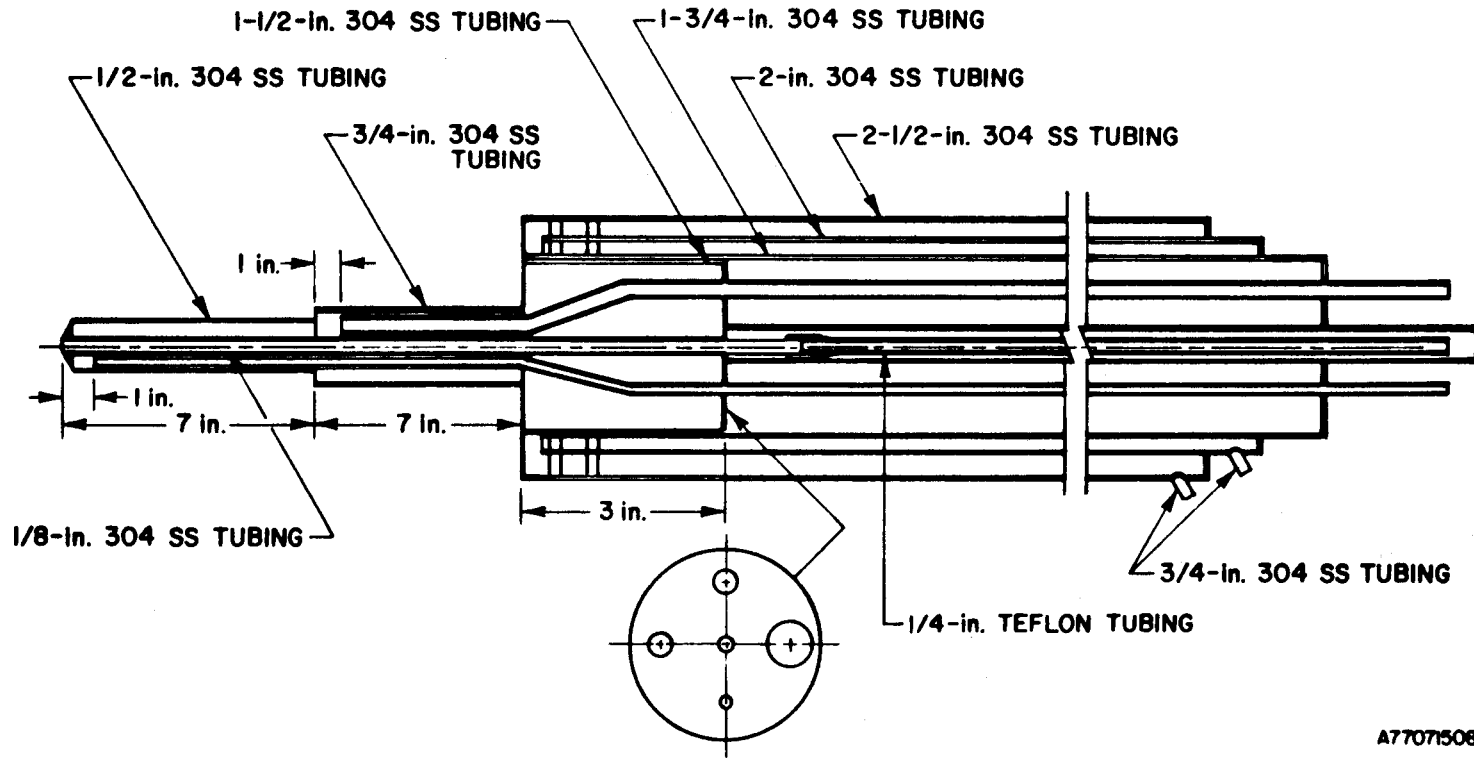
ASSEMBLY DRAWING OF GAS SAMPLING PROBE
